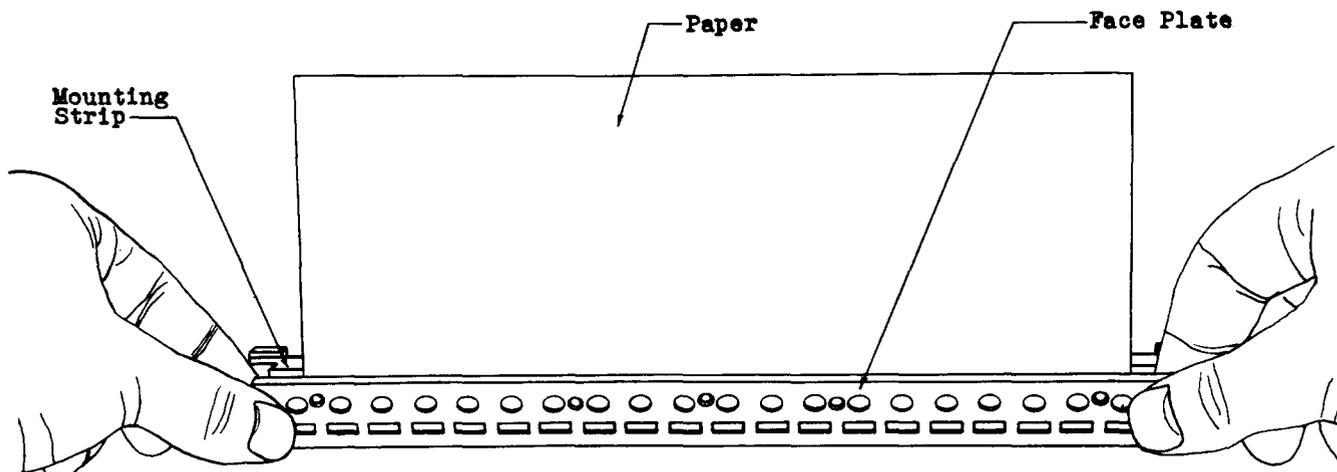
Method of Assembling Face Plate on Mounting Strip
